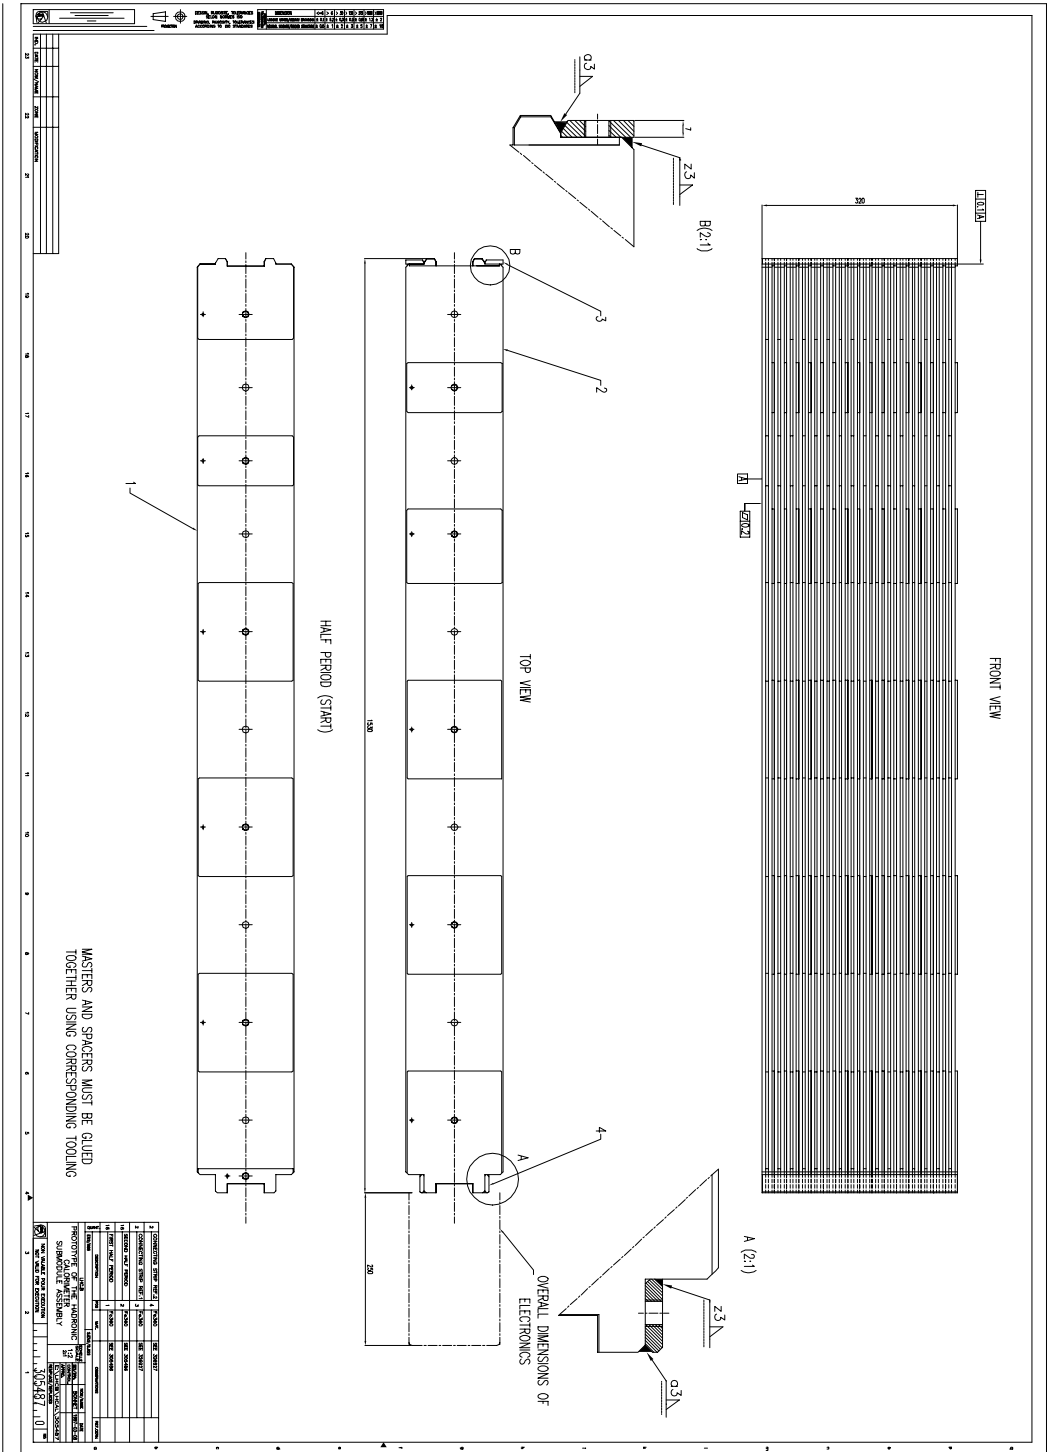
The HCAL submodule assembly drawing. Spacer layout on the master plate is shown separately.
